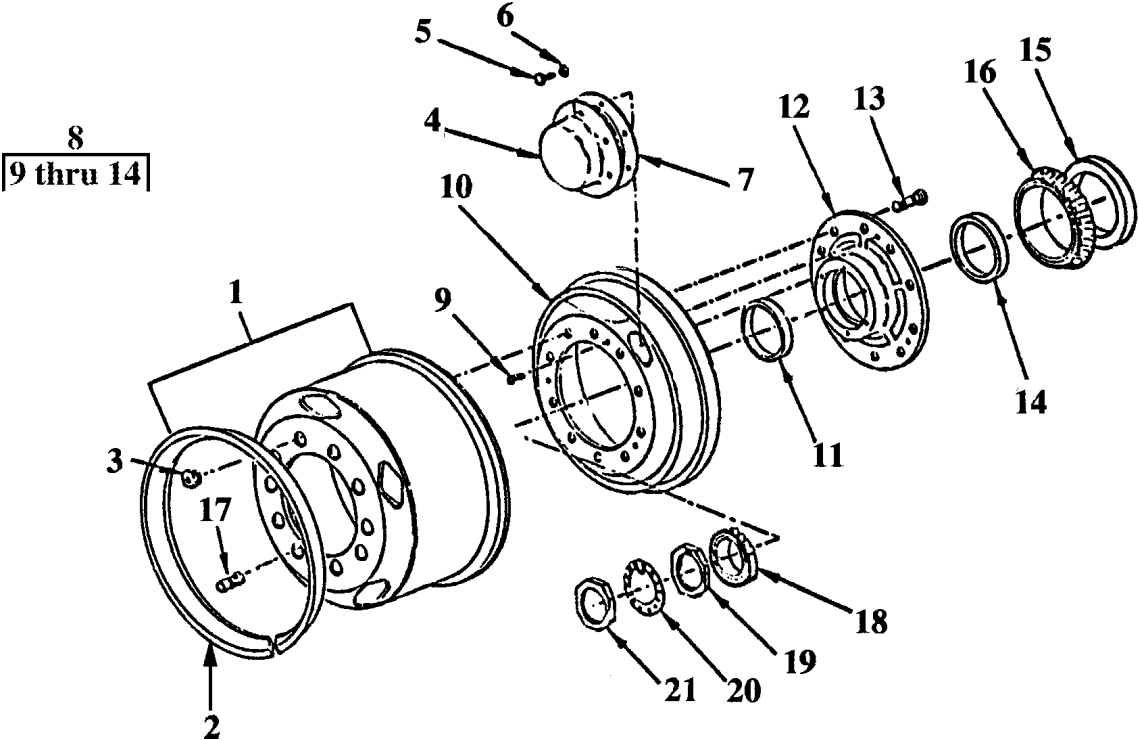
Wheel, Hub, and Drum Assembly (XM1063 Only)
